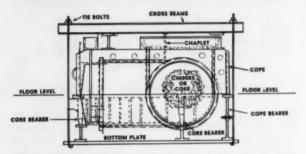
Mold and core assembly ready for pouring pipe tee for irrigation system.
